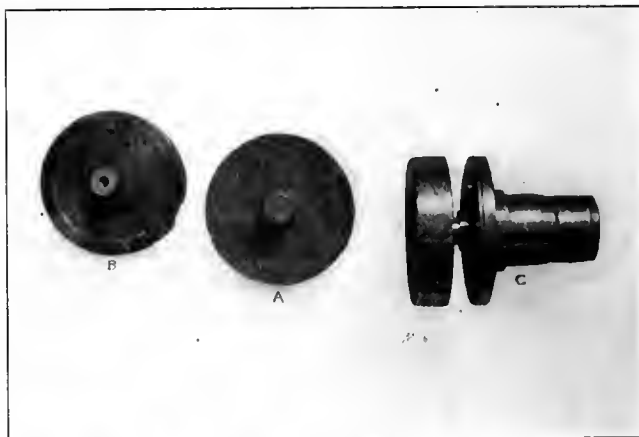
Turntable of the Block with Jig and Chuck for Machining It
